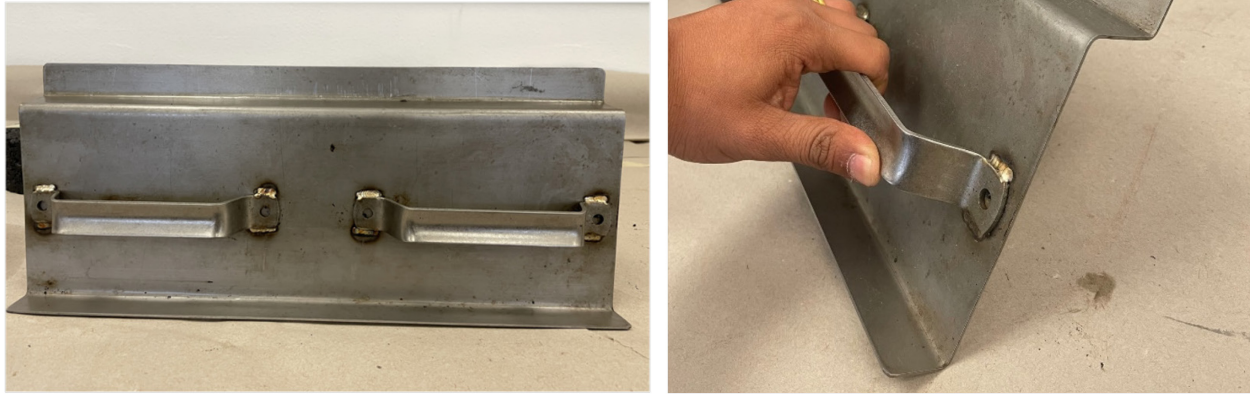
Spacer for wedge construction: a) Front view of wedge spacer, b) Side view of wedge spacer.
